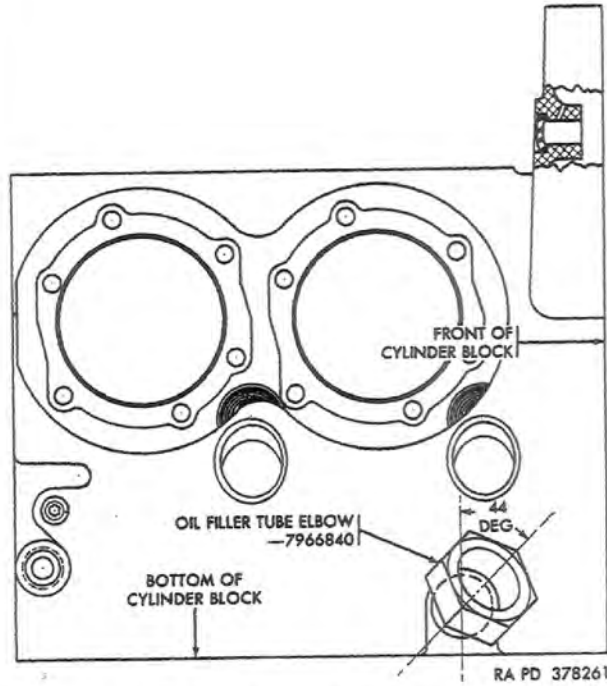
Installed position of oil filler tube elbow—Sectional view.
